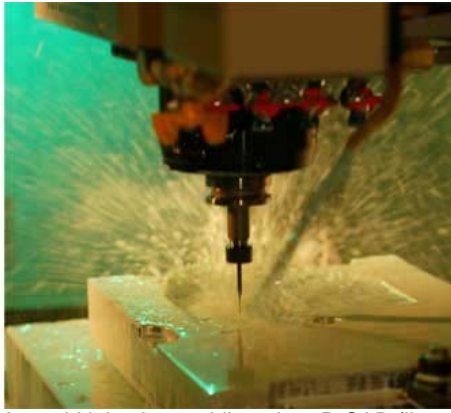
In rapid injection molding, the 3D CAD file used to generate the mold design is downloaded to Protomold's advanced software system, which automatically outputs tool paths for the high-speed HAAS CNC machine centers to manufacture the molds.
